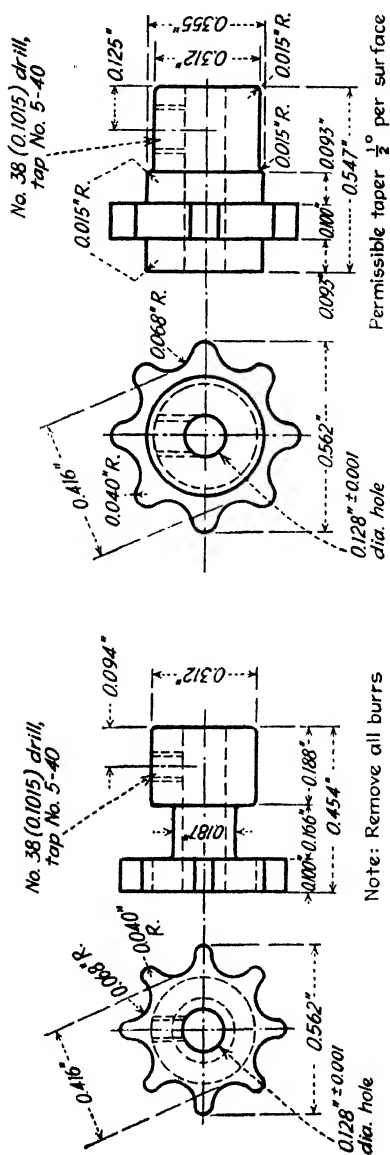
Sprocket with hub as produced on the screw machine (left) and later, in somewhat modified form, as a die casting (right).
